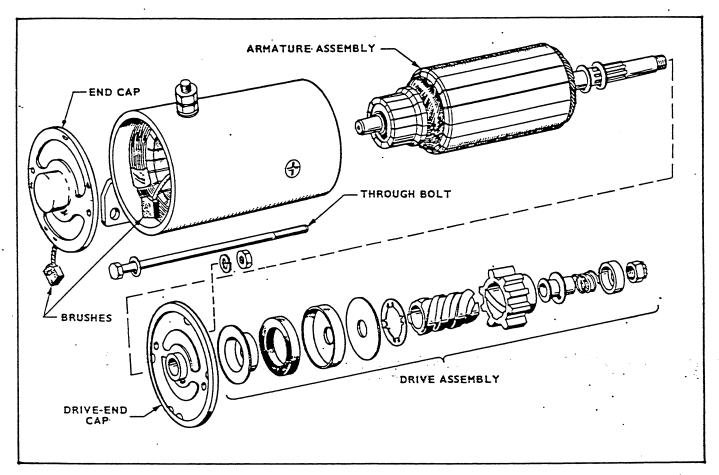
ELECTRIC STARTER ASSEMBLY
